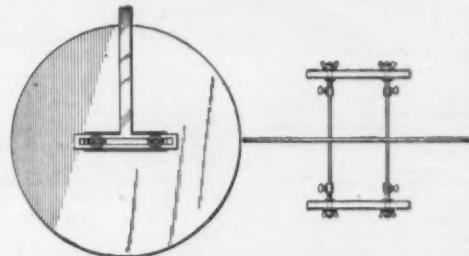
SCROLL SAW ARRANGED FOR MAKING PARALLEL CUTS.
